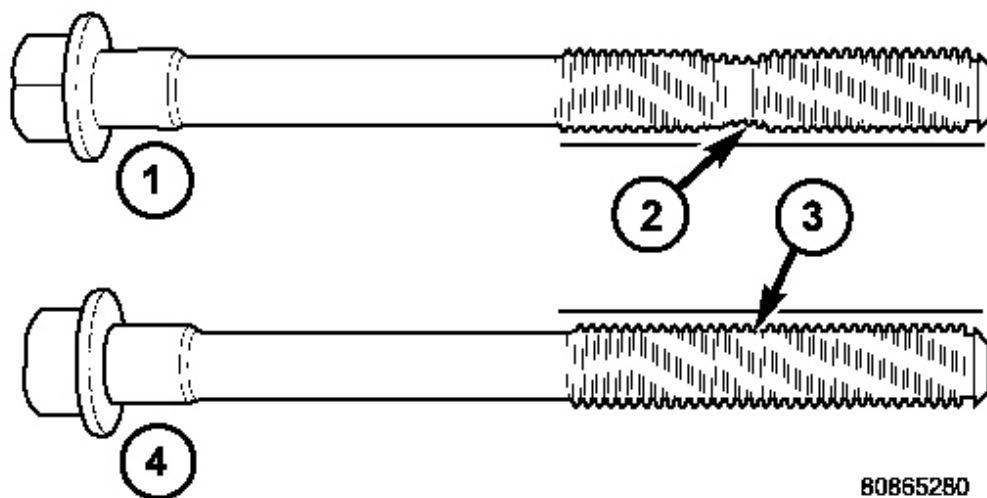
Checking Cylinder Head Bolts for Stretching (Necking)
